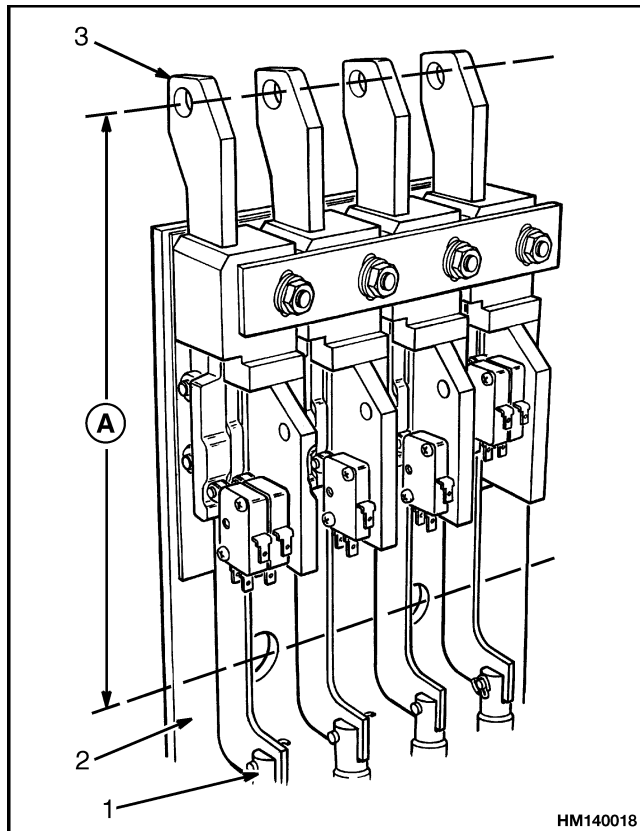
Control Valve Linkage for ERC/P16-20AAF (ERC030-040AF, AG/BG) (A814); ERC/P16-20AAF (ERC030-040AH) (B814/C814); ERC20-30AGF (ERC040-065RF/ZF, RG/ZG) (E108); and ERC20-32AGF (ERC040-065GH) (A908) Lift Trucks
